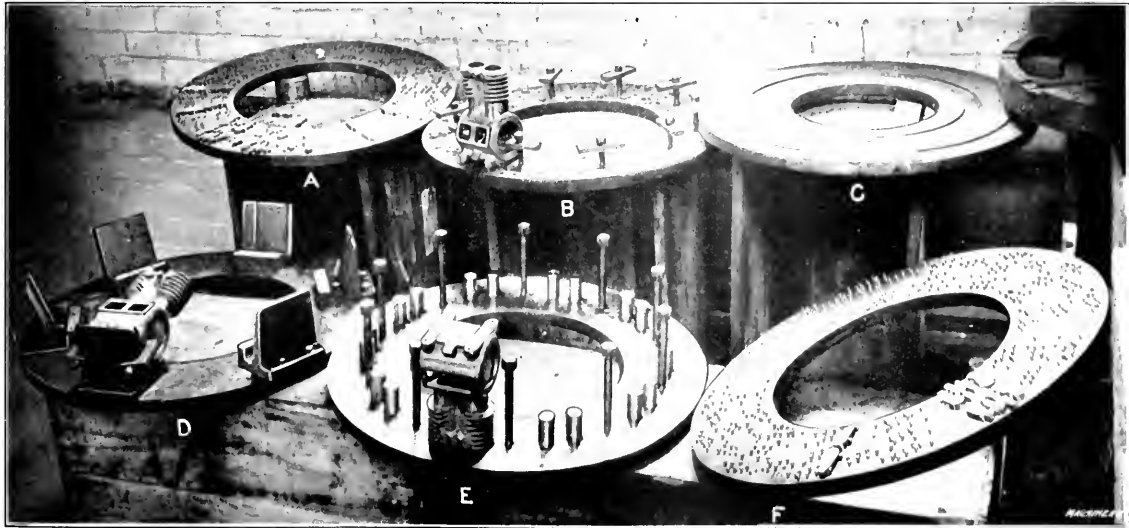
Six Work-holding Fixtures for a Blanchard Grinder
